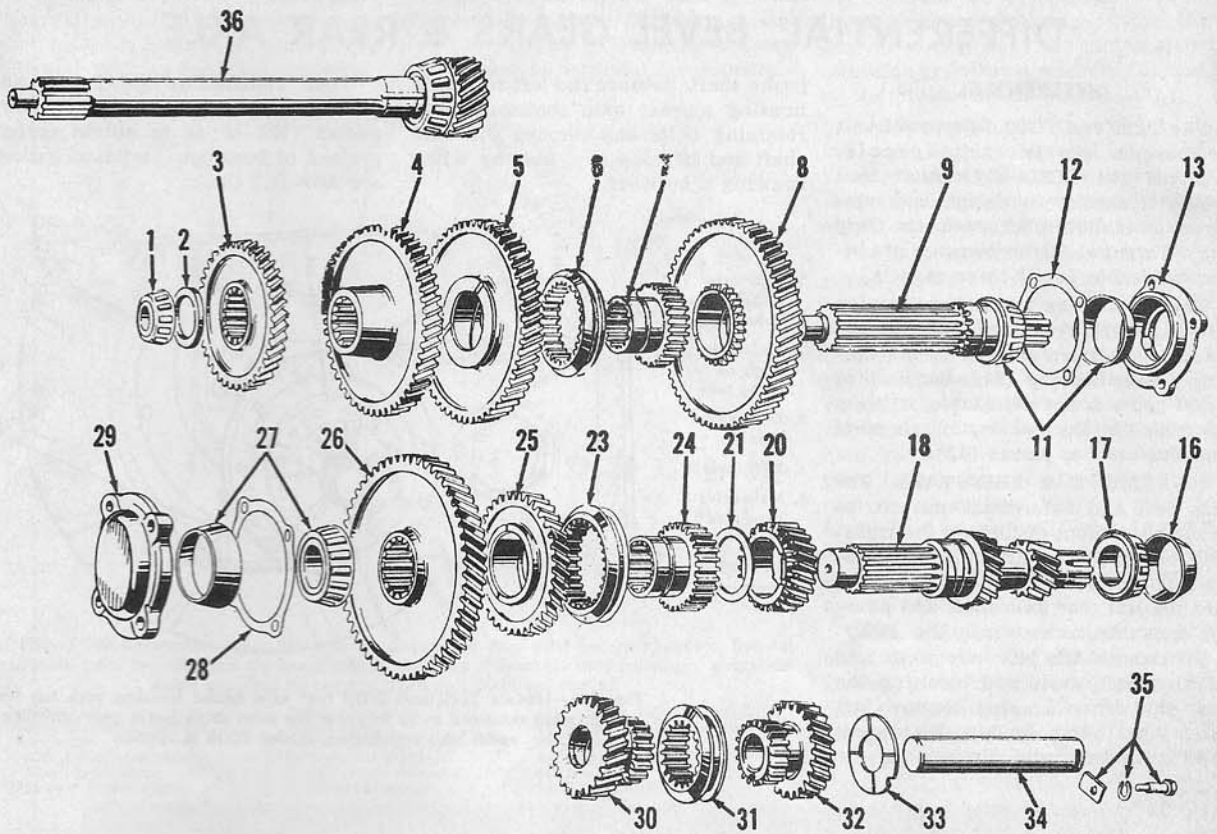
TE20 transmission shafts, gears, and components. Gears (8 & 20) rotate on bronze bushings.
